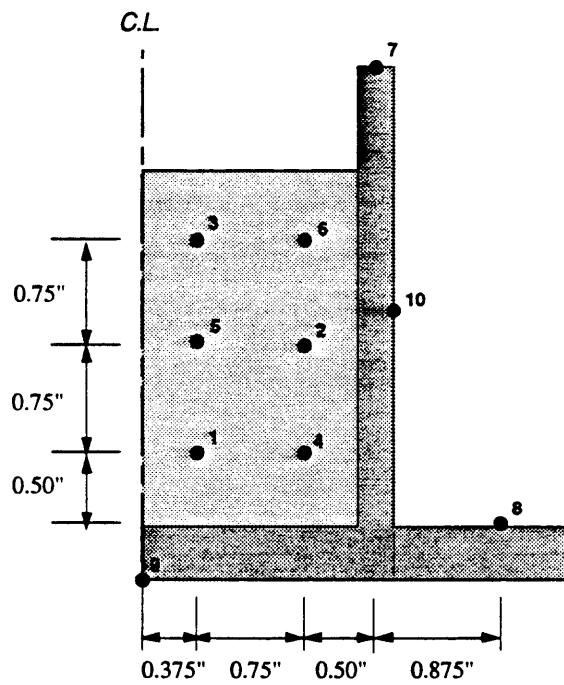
Cross sectional diagram showing dimensions of aluminum casting assembly.
